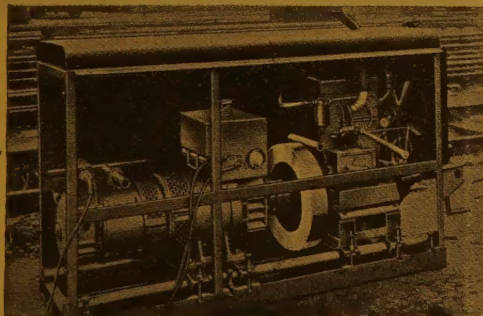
Diesel-electric welding set ready for use.
